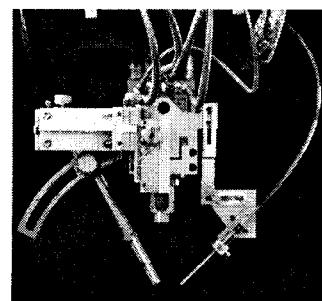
CO₂ laser-MIG hybrid welding system
